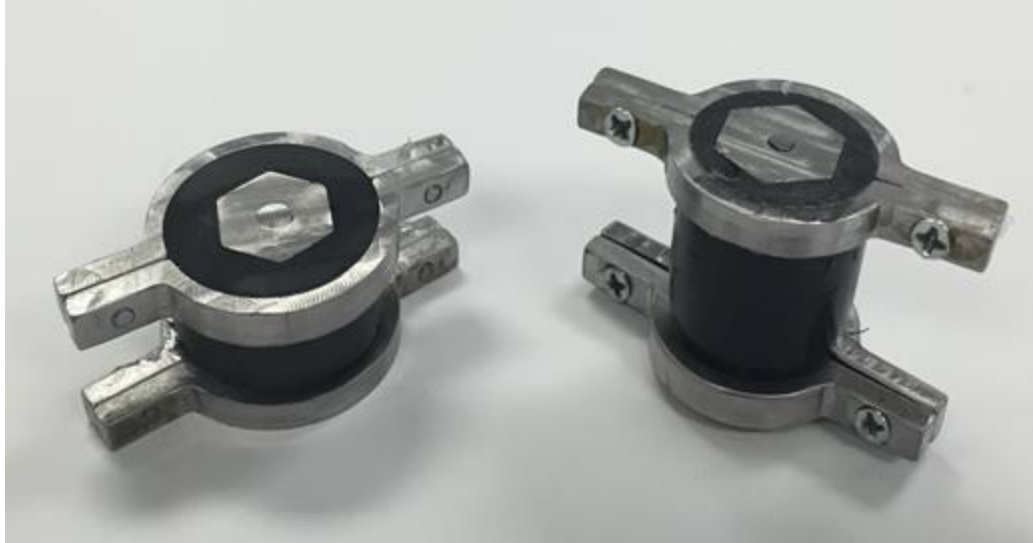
The Stance and Swing Actuating Parts with Fixtures at Both Ends.
